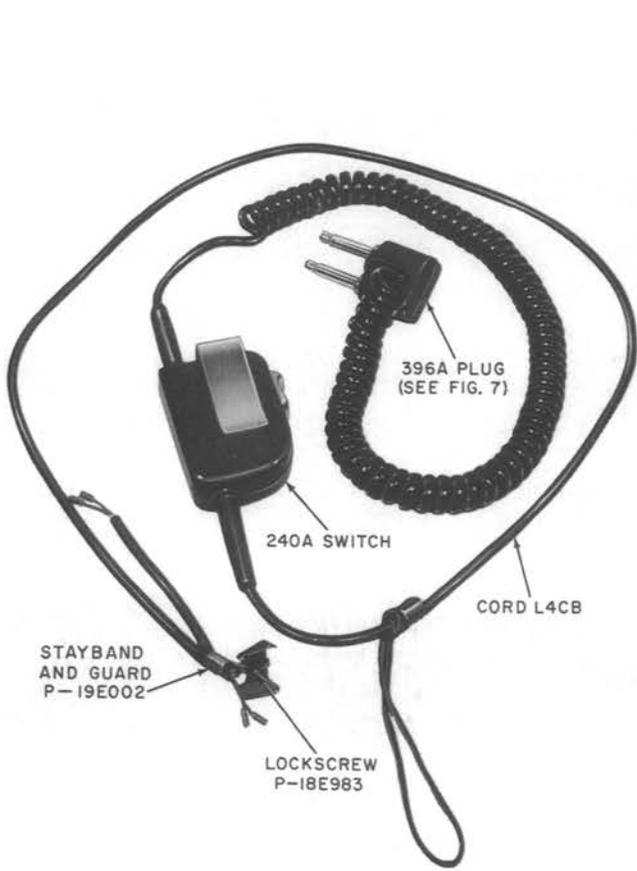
Cord Assembly (52PR and 52RR Head Telephone Set)
